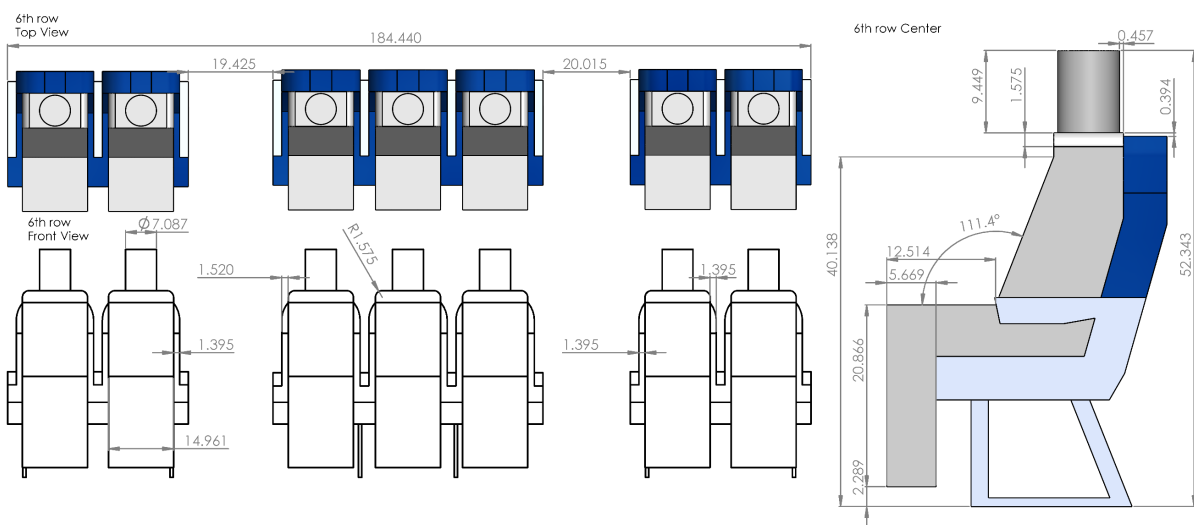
2D drawings of manikins seated in seats of the 6th row. Dimensions in inches.
